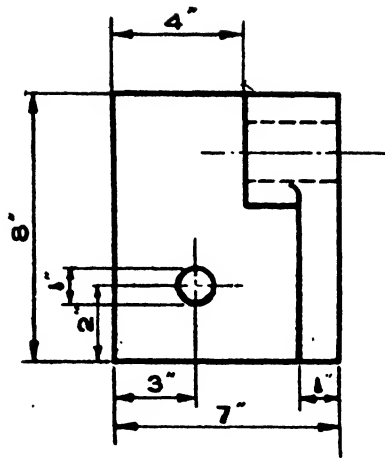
DIMENSIONS WHOLLY OUTSIDE THE VIEW
